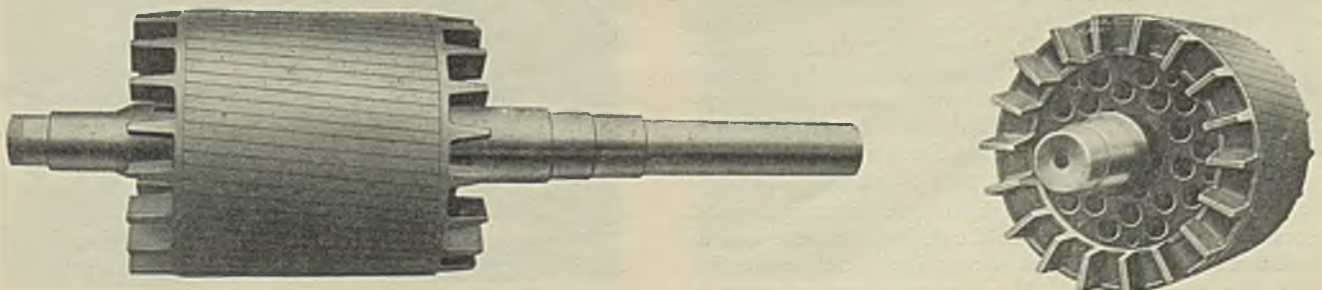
The rotor bars, end ring and fan are cast in one solid piece in the rotor laminations.
